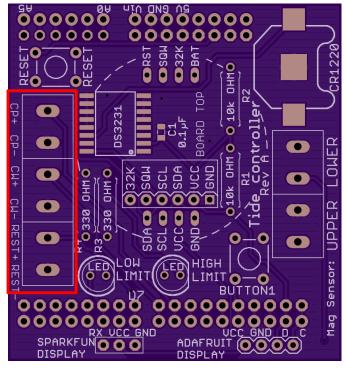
Positions for terminal blocks (highlighted in red) are provided to hook wires to the CW230 stepper motor controller. The labels here match the labels used on the CW230.
